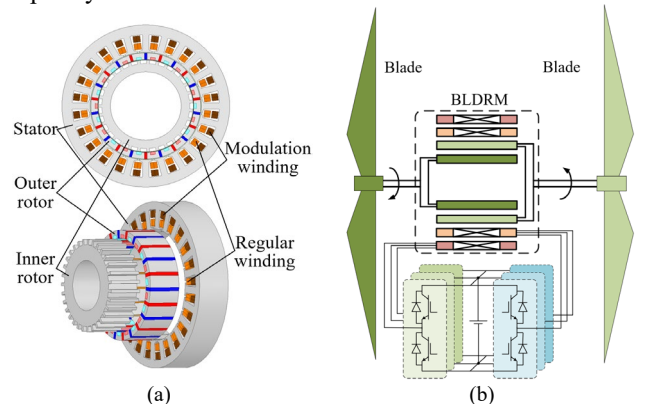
(a) The structure of BLDRM [13]. (b) Counter-rotating propellers using BLDRM.
